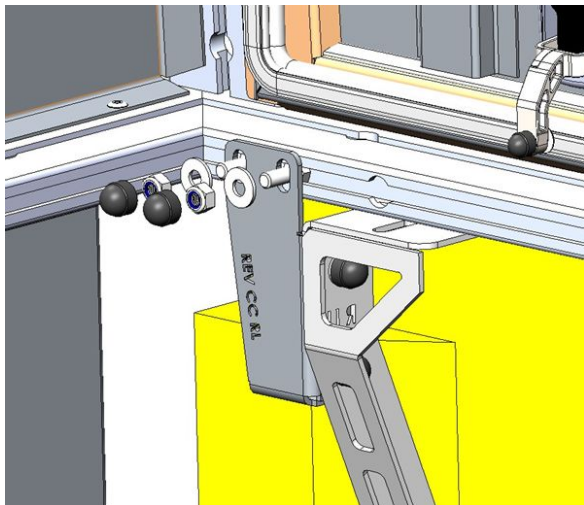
Position the Rear Mounting Bracket over the inserted Hex Bolt and fasten with a Washer and Nyloc Nut
